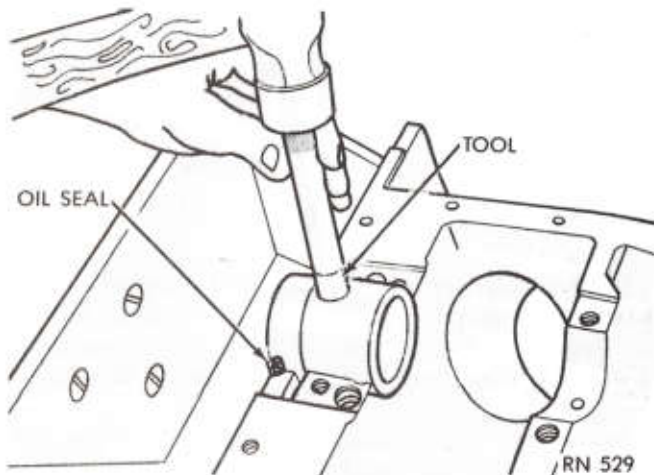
Installing Upper (and Lower) Oil Seal with Tool C-3511
